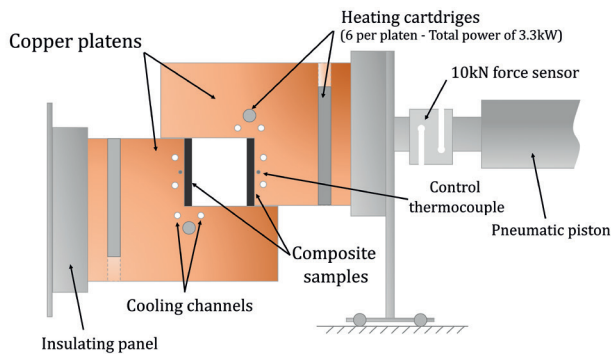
Schematic view of the TACOMA welding bench
